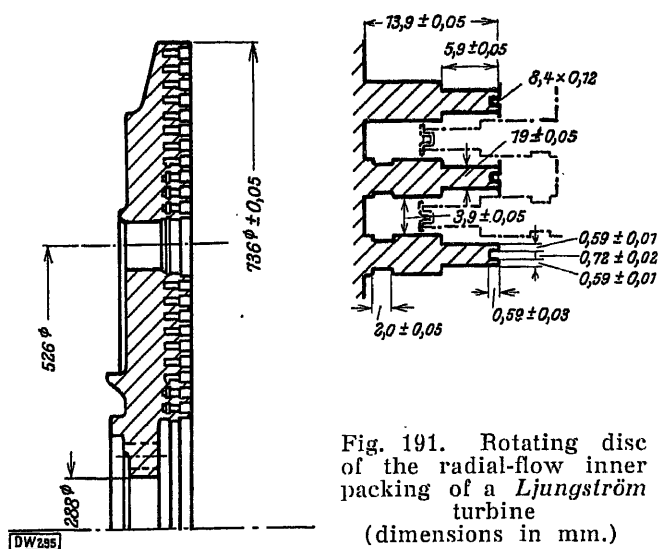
Rotating disc of the radial-flow inner packing of a *Ljungström* turbine (dimensions in mm.)
